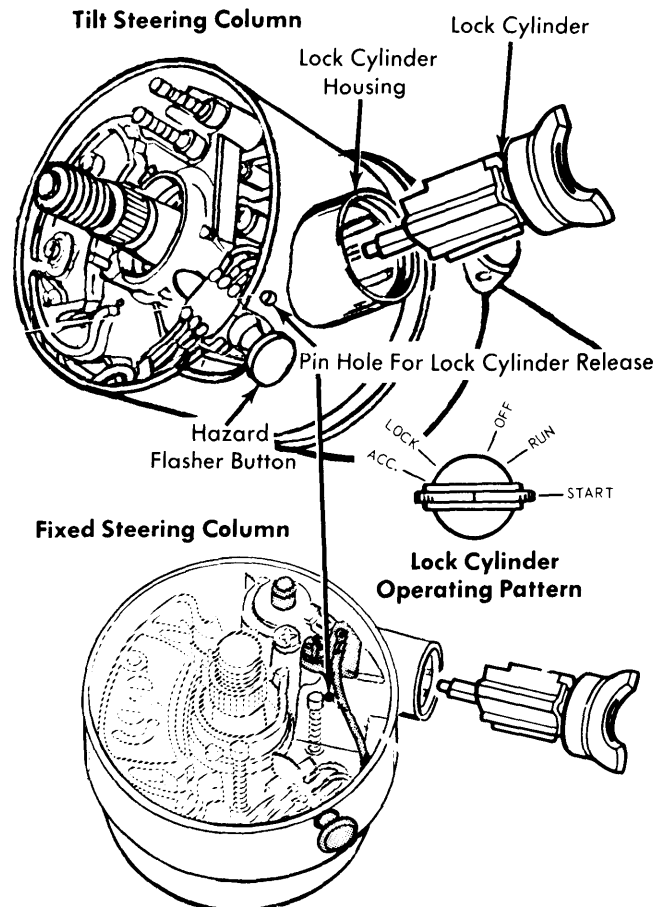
Ford Motor Co. Lock Cylinder Assembly Showing Lock Cylinder Release Pin Hole
